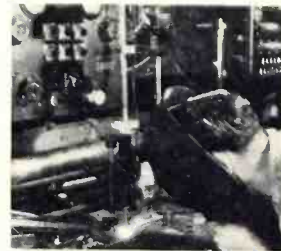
Automatic helium-shielded arc-welding equipment in operation.
